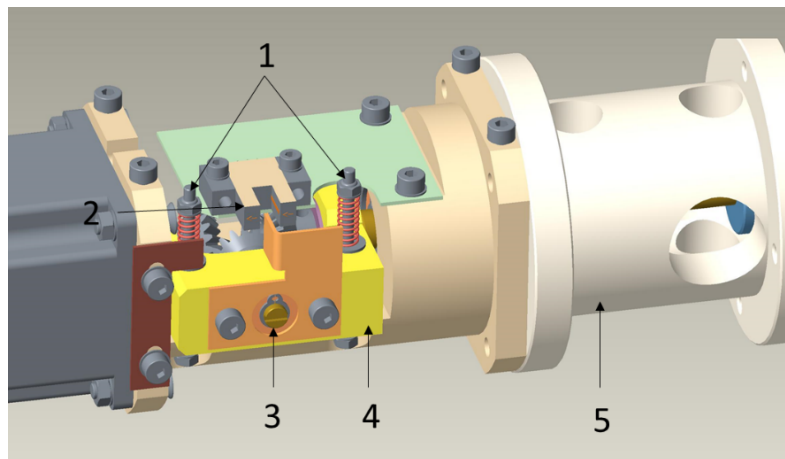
Torque Limiter for metering valve with the following parts identified: 1. Adjustment springs for torque limiter, 2. Optical switch, 3. Manual valve screw (rotate clockwise to close the valve) 4. Lever, 5. Mounting adapter for valve drive.
